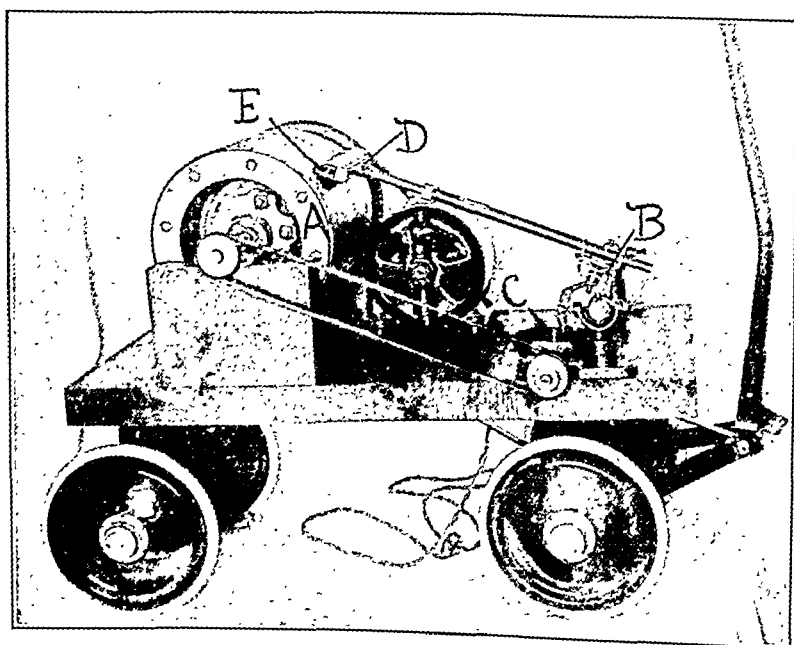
Side view of machine. Parts lettered as in Fig. 1.
